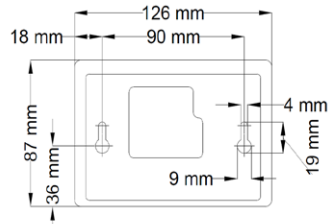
Dimensions of the panel's back part for wall assembly.
